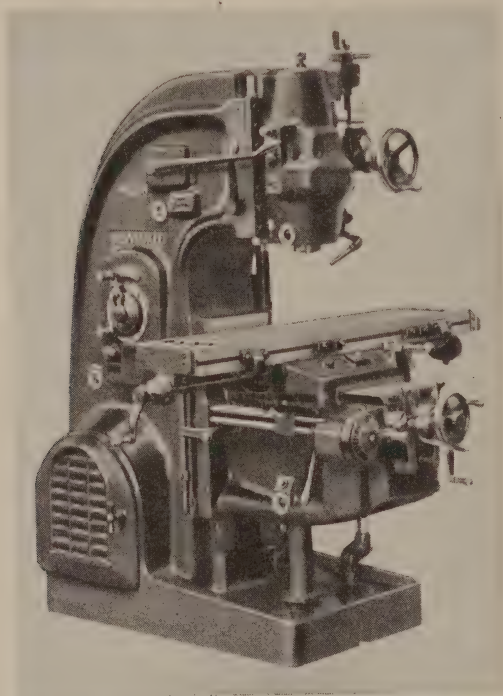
Vertical-spindle milling machine. Spindle speeds up to 2,000 r.p.m., table feeds up to 60 in. per min., rapid traverse of 150 in. per min. for table and 75 in. per min. for knee. Sliding head has 4 in. of vertical adjustment with 4-piston stop and micrometer dial for high-production step milling. (Courtesy of Kearney & Trecker Corporation.)
